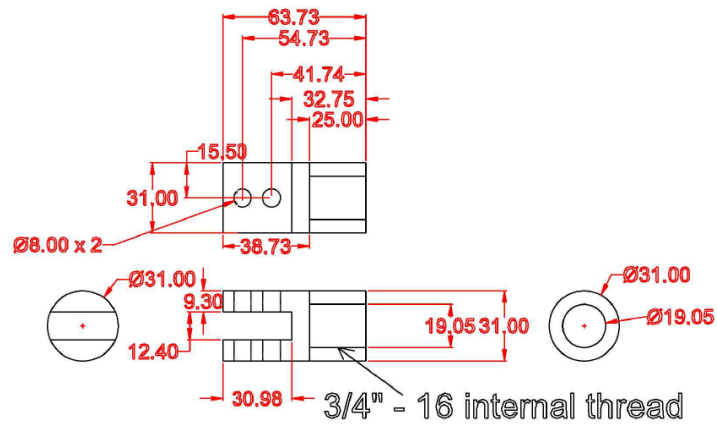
Adapter designed for the back-pressure pneumatic cylinder.
